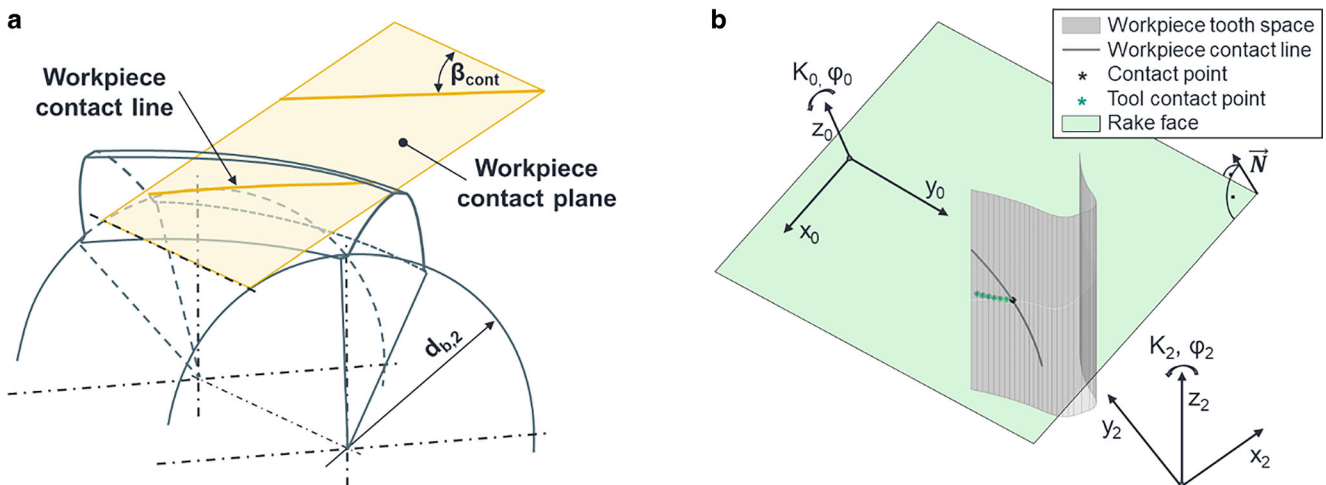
(a) Contact line of a helical workpiece in analogy to [12]. (b) Contact in rake face
